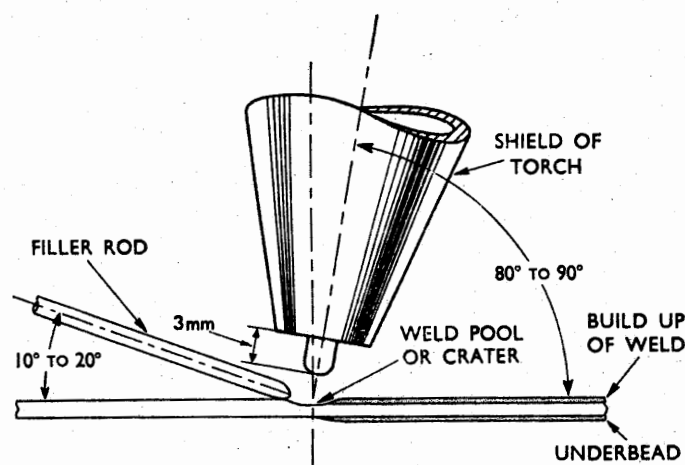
RECOMMENDED ANGLES FOR TORCH AND FILLER ROD
